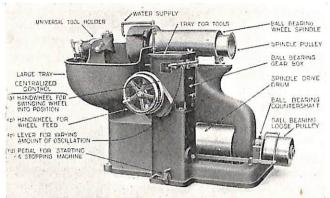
Lumsden oscillating tool grinder (Alfred Herbert, Ltd.)
